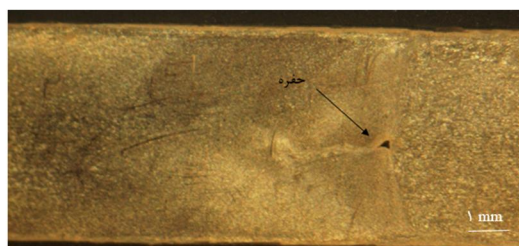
Welding macrostructure performed at a speed of 1500 rpm with the help of Bobbin tool made from hot-worked steel H13
